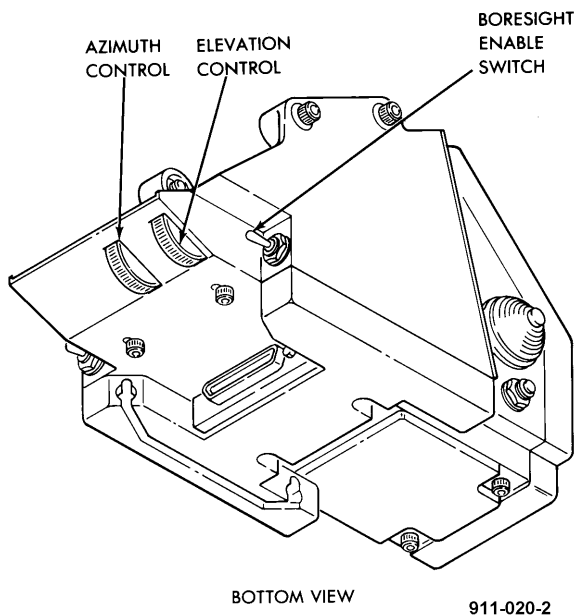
Optical Relay Tube Assembly Control and Indicator Location (Sheet 2 of 2)
